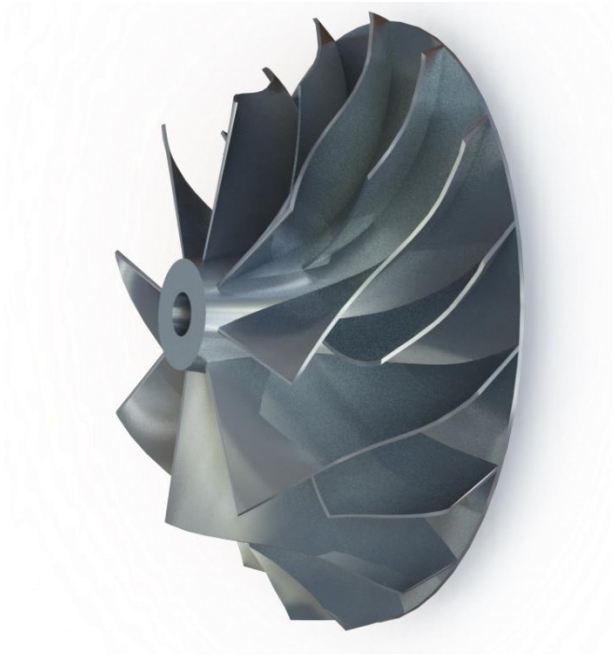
3D rendering of Holset Hx82 152mm compressor wheel
